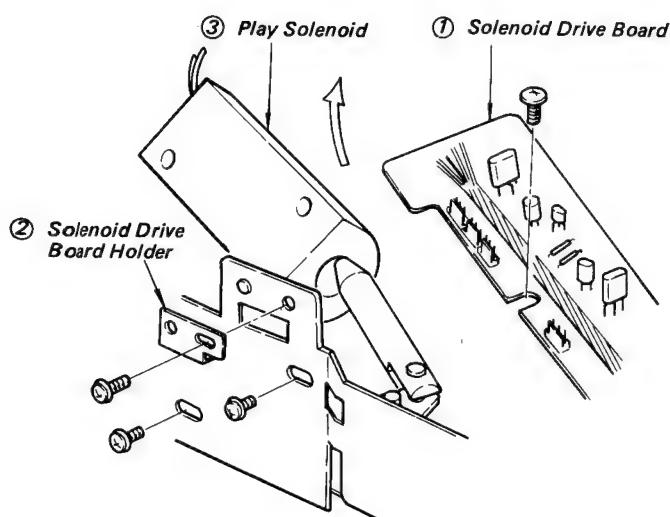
Solenoid Drive Board and Its Holder Removal
